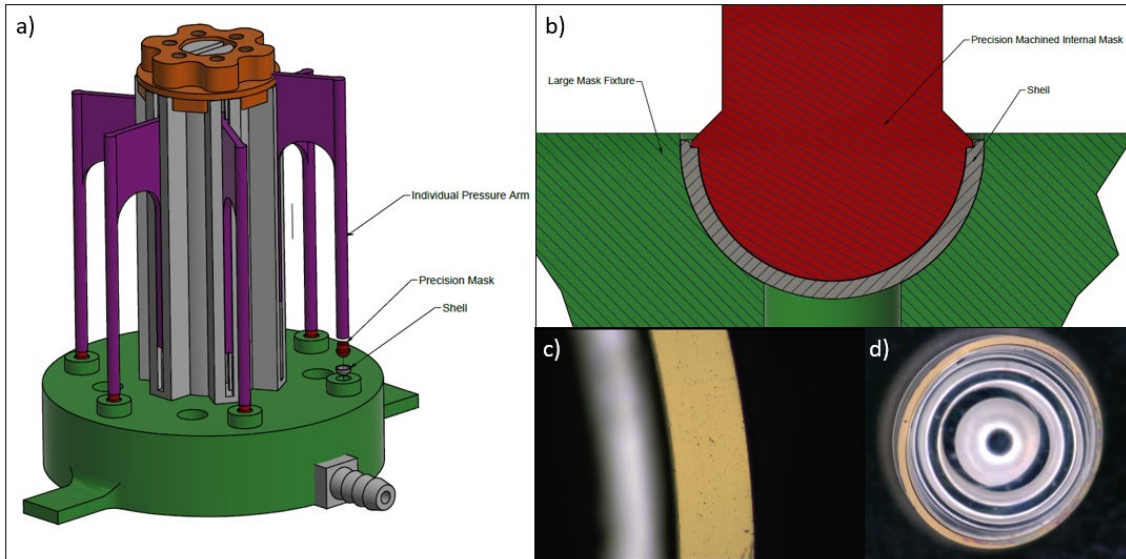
, a) Mechanical trapping fixture with individual arm control, b) Detail view of fixture and mask, c) High-mag view of gold coating, d) Overall view of gold coated slant joint
